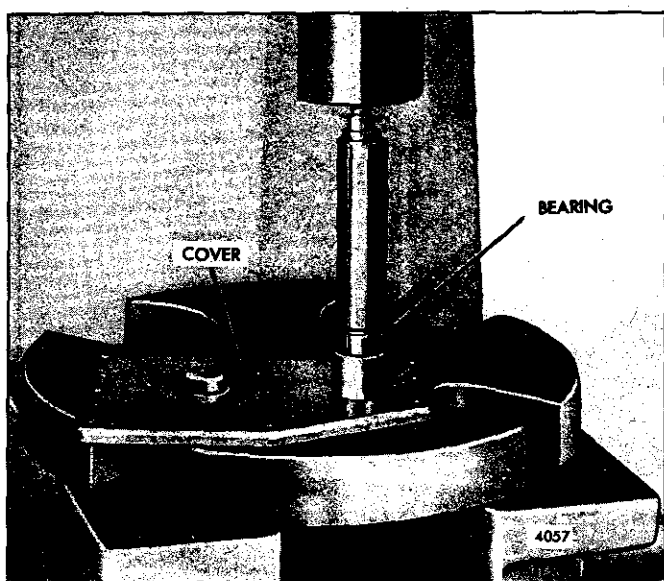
Installing Governor Cover Bearings Using Tool J 21068
